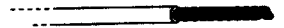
Tinned, stranded wire should be firm with even solder coating and penetration
